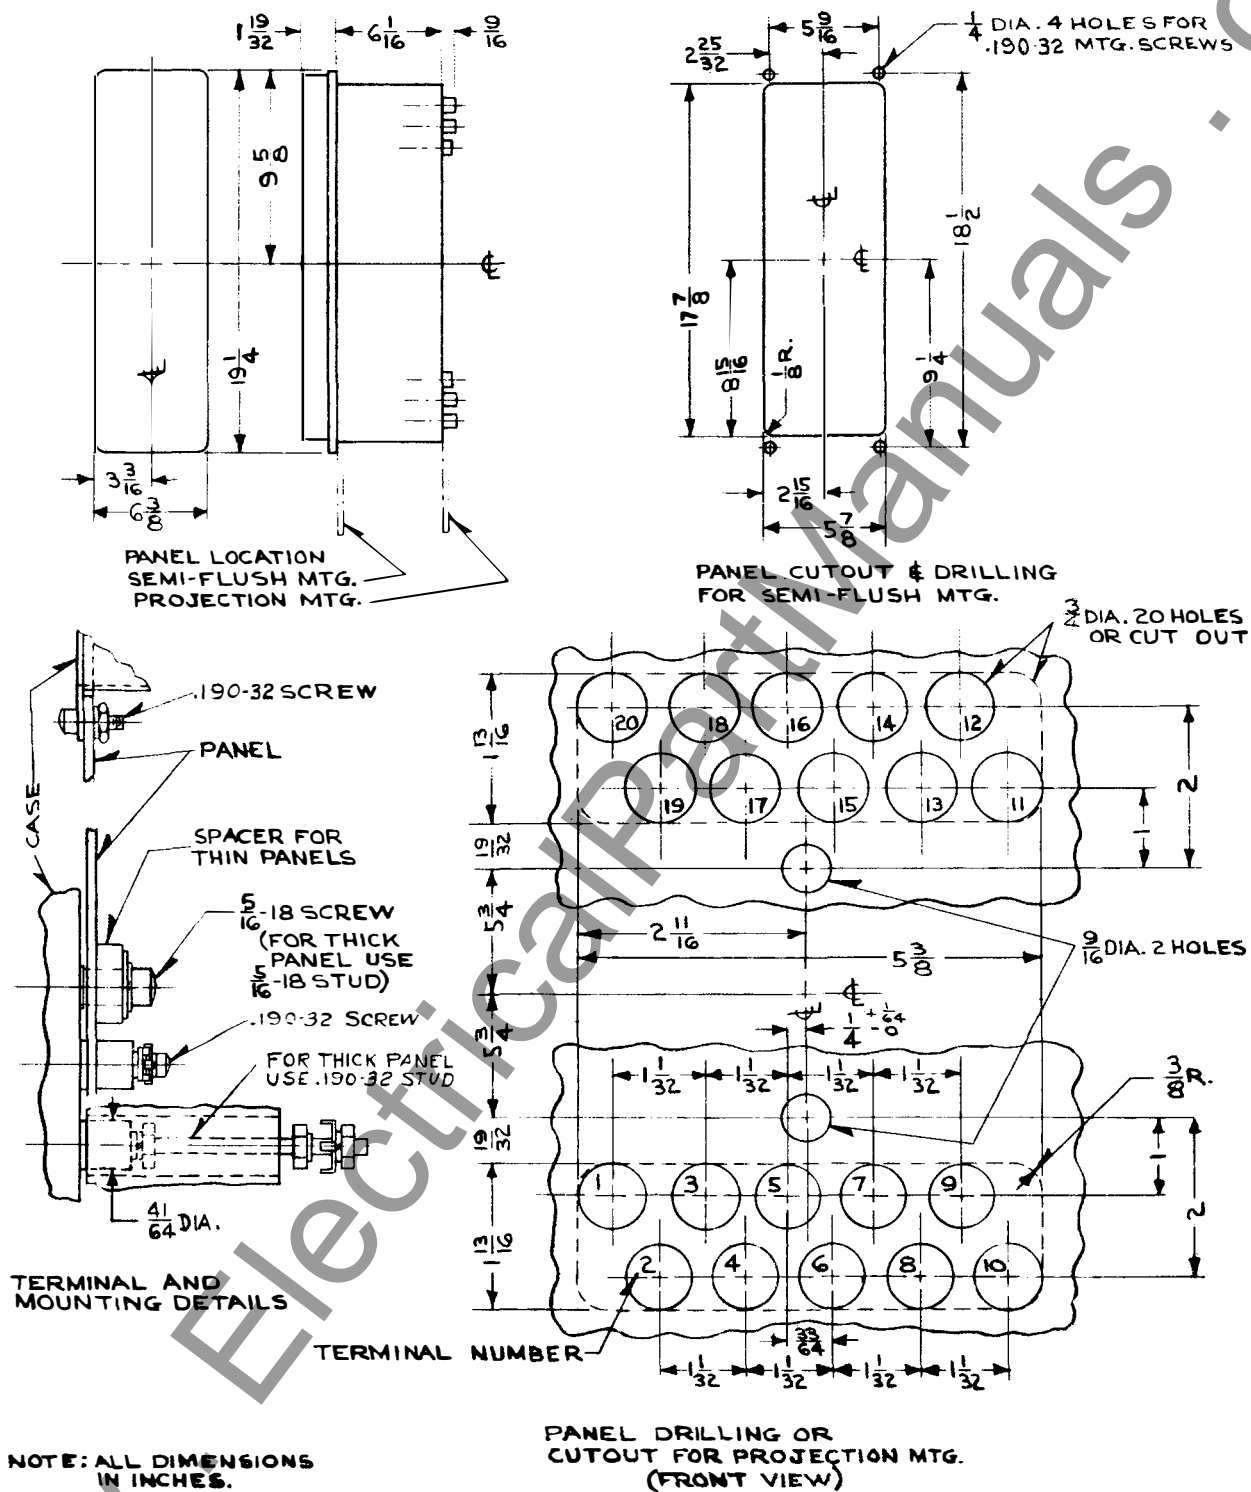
Outline and Drilling Plan for the Type FT32 Case
